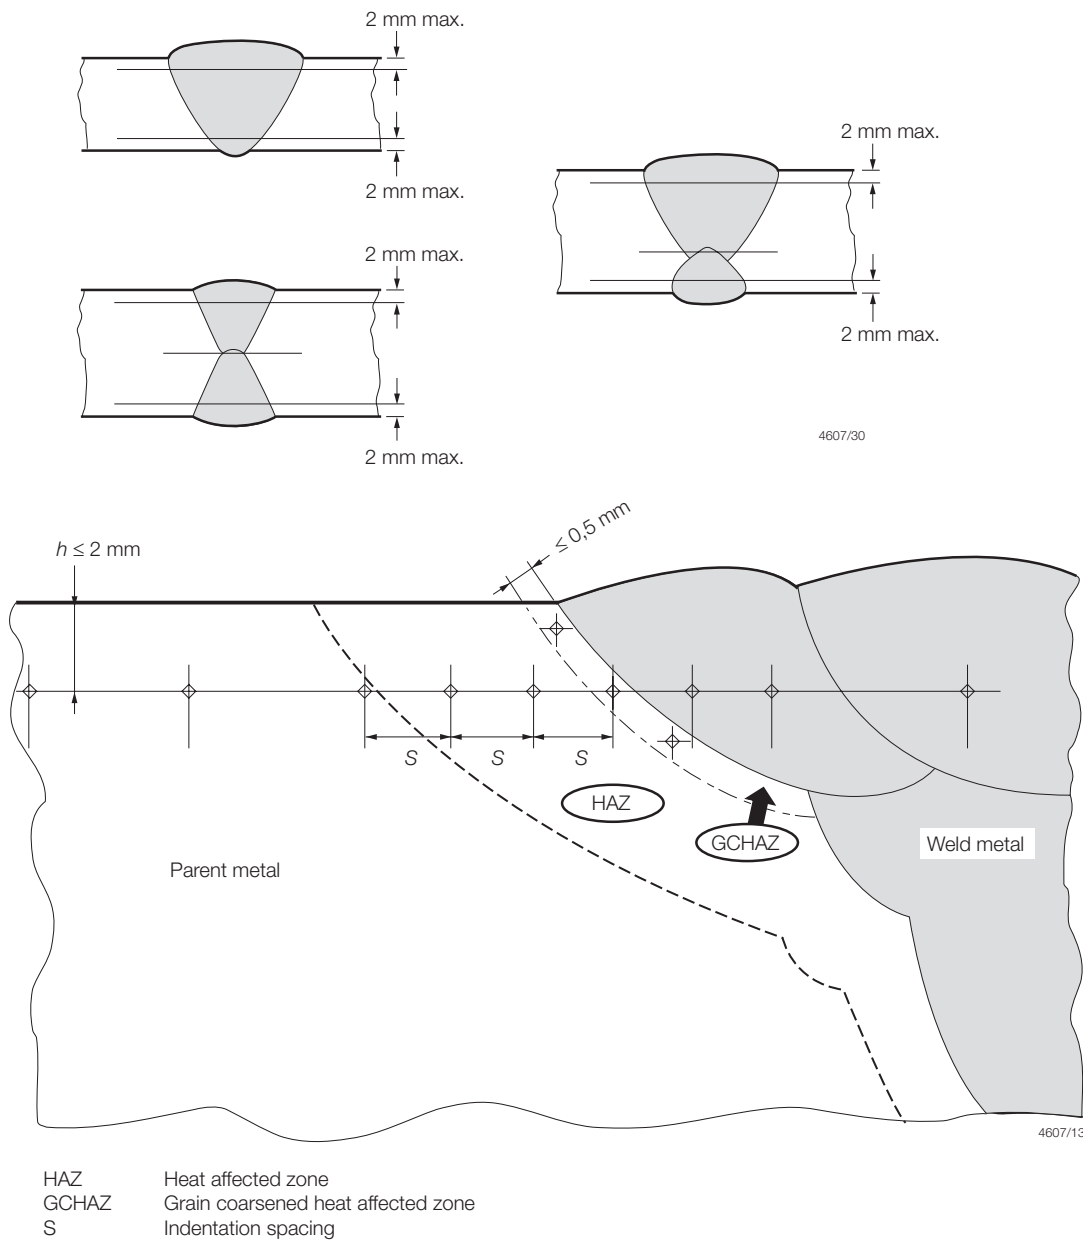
Hardness testing locations for butt welds
